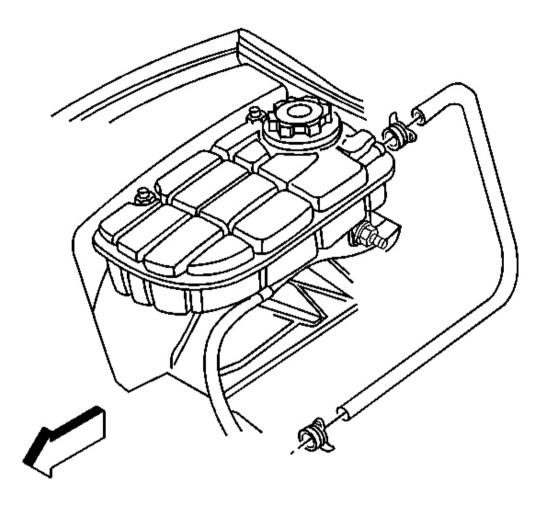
Surge Tank Upper Hose & Radiator Inlet Courtesy of GENERAL MOTORS CORP.
